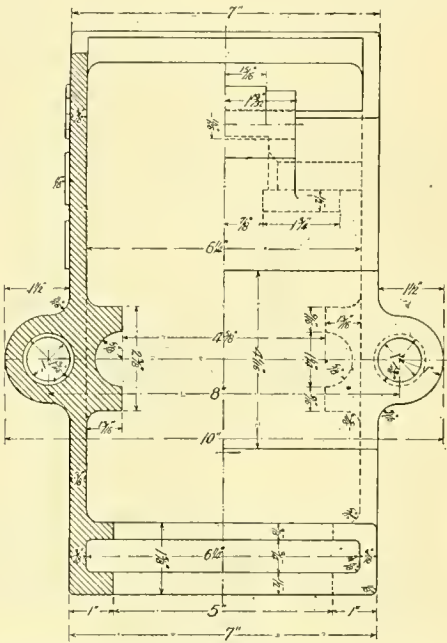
Half Plan and Half Horizontal Cross Section.
